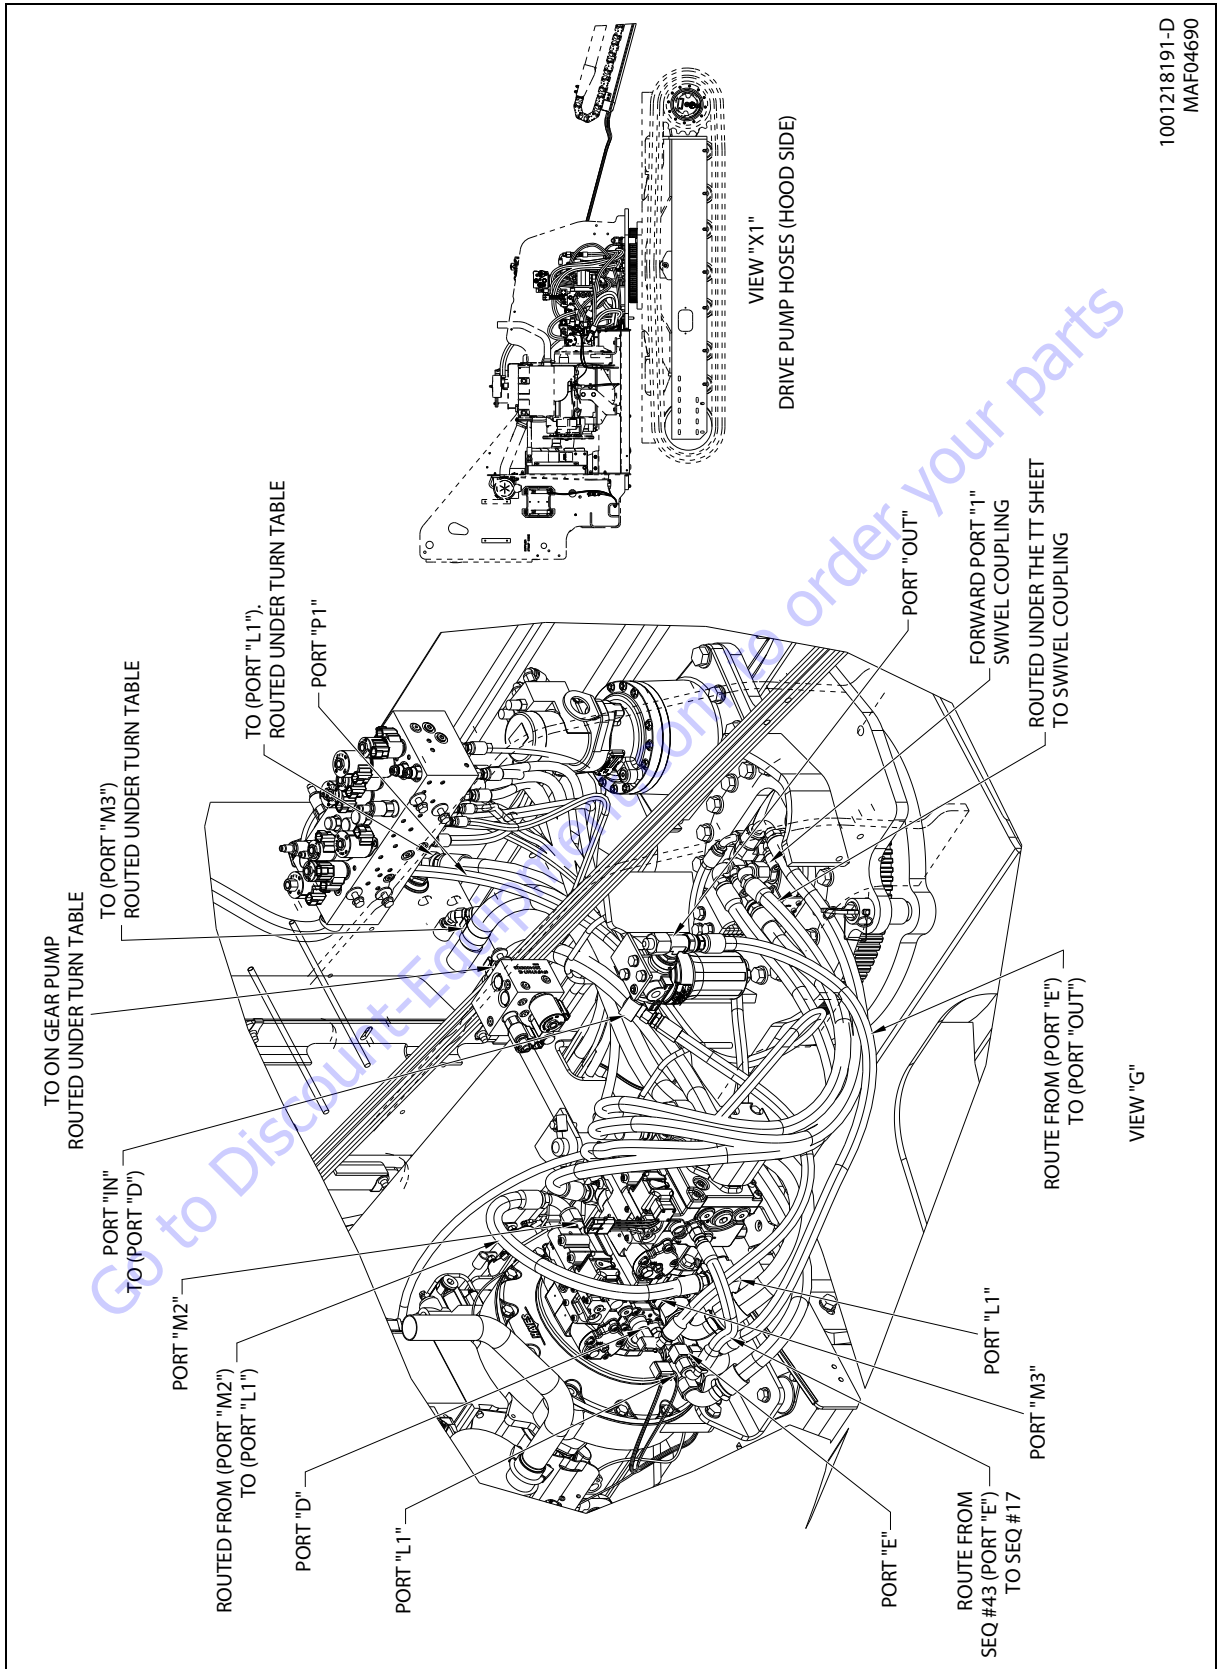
Hydraulic System Installation (4605JC) - Sheet 8 of 15
